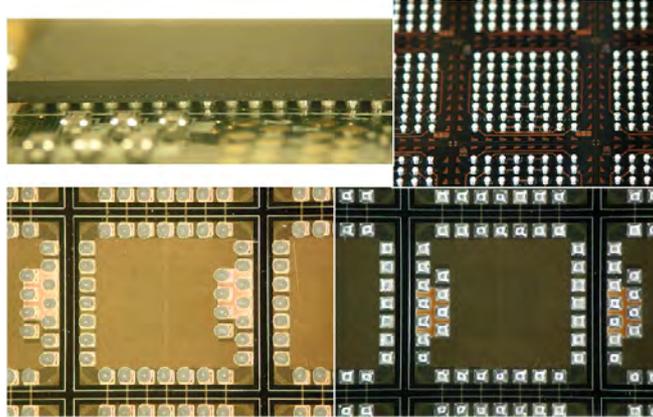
Illustrating the use of solder bumps: an assembled BGA package (top left), solder balls applied as bumps on naked dies (top right, 450  $\mu\text{m}$  pitch), and the deposition of solder paste for wafer-level bumping before and after curing (bottom left and right, 300  $\mu\text{m}$  pitch)
